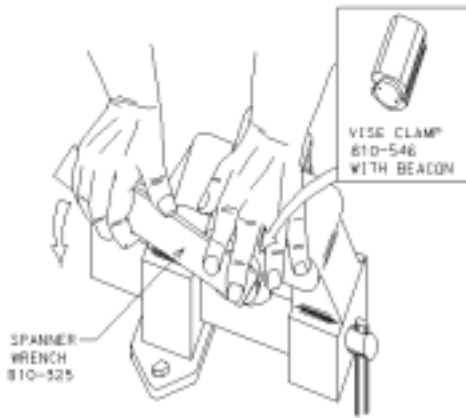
Battery End Cover Removal With Vise Clamp and Spanner Wrench
